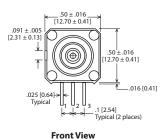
SHA12: Concentric Shafts, Solder Hooks, 2 Potentiometer(s) or RS + PP, 1/4" Bushing
